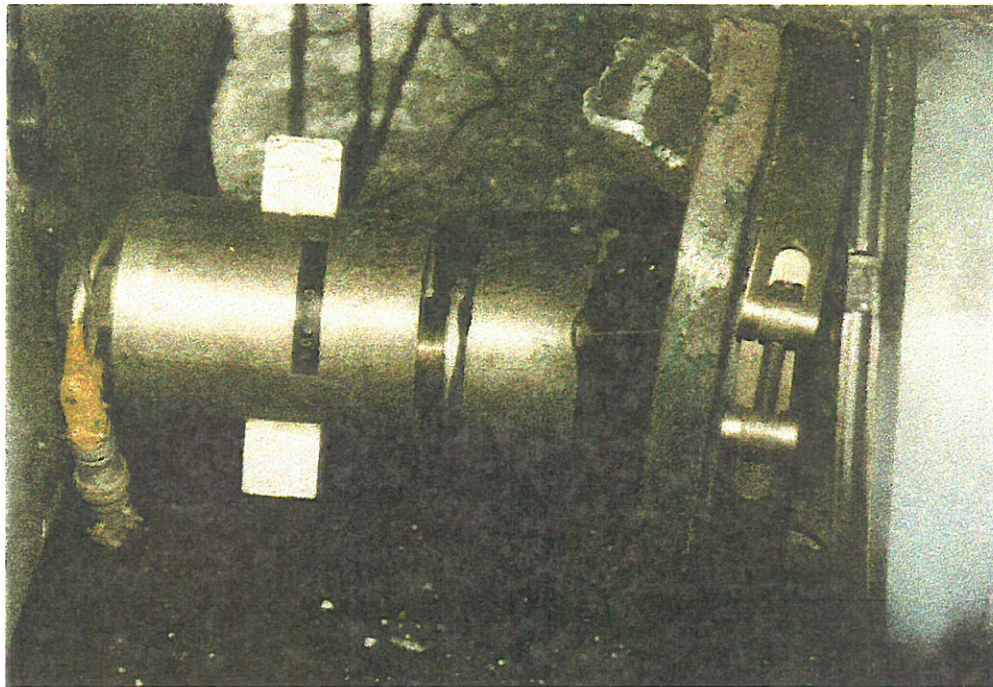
Rocket Motor Malfunction, Motor Forward End View
